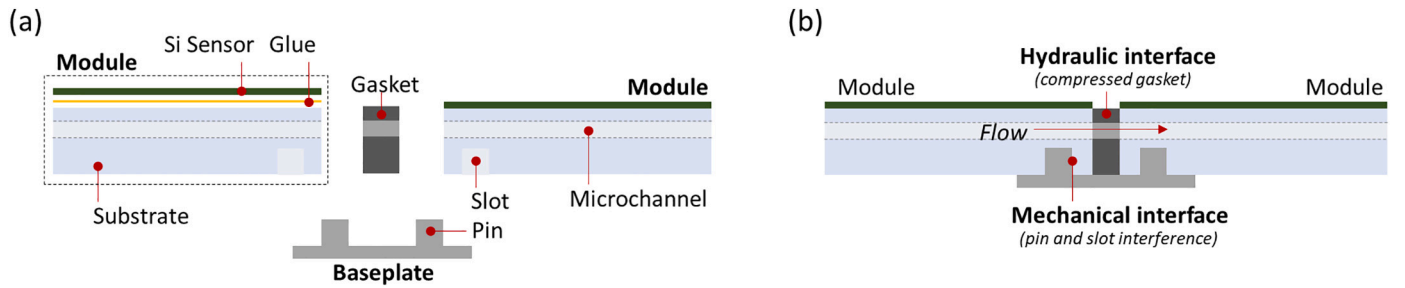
Interlocking modular concept: Exploded view (a) and assembled view (b).
